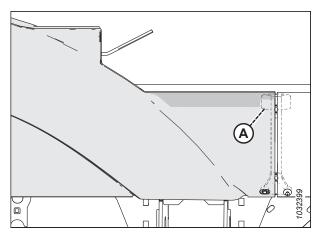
Right Outboard Linkage Cover – View from Rear of Header
